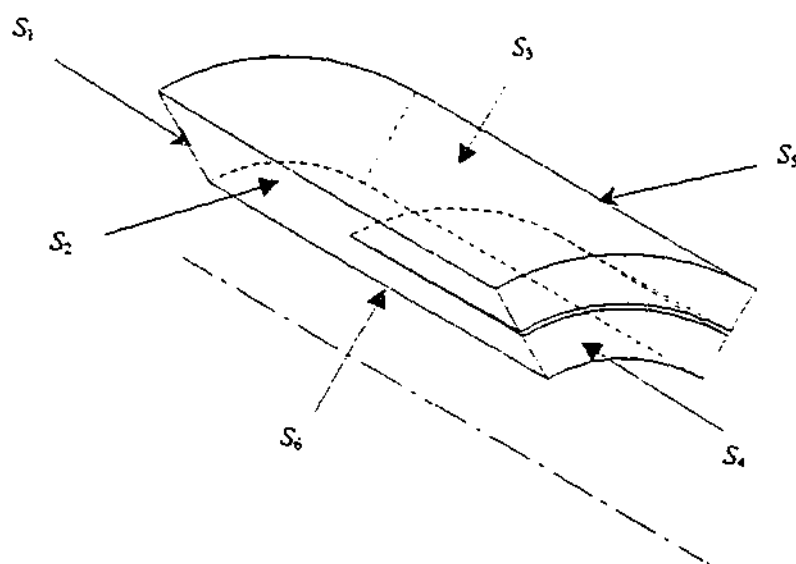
Circular Segment for Analytical Consideration of Single Fillet Lap Weld
